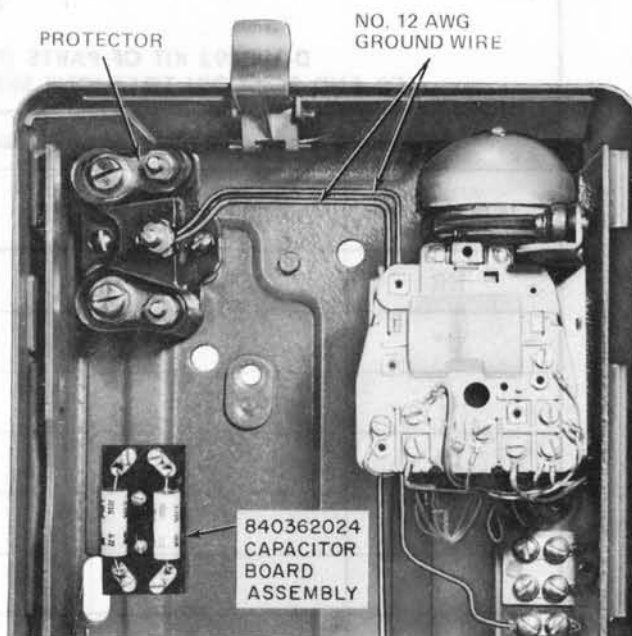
Capacitor Board Assembly Mounted in 1-Type Set
